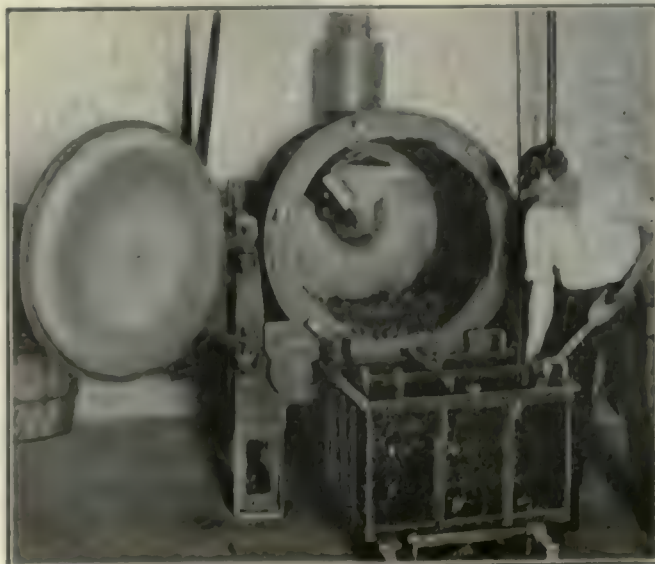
LOADING THE SAND-BLASTING MACHINE
